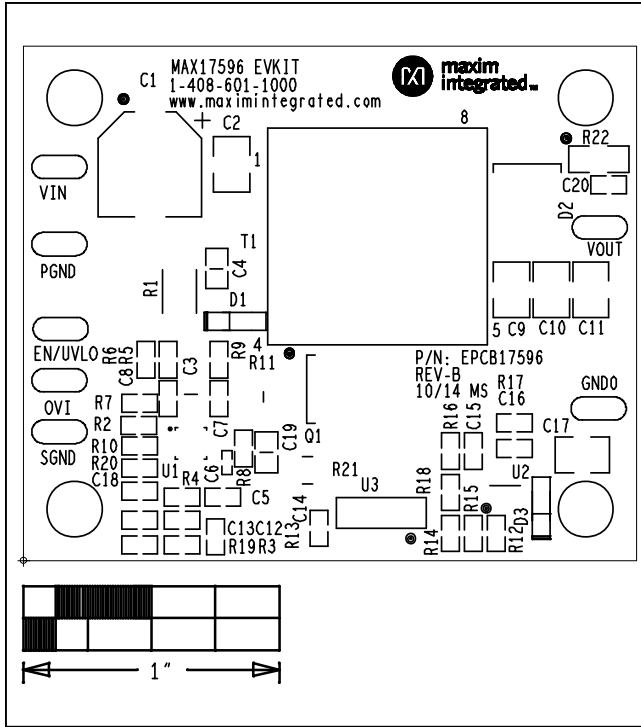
MAX17596 EV Kit Component Placement Guide—Component Side
